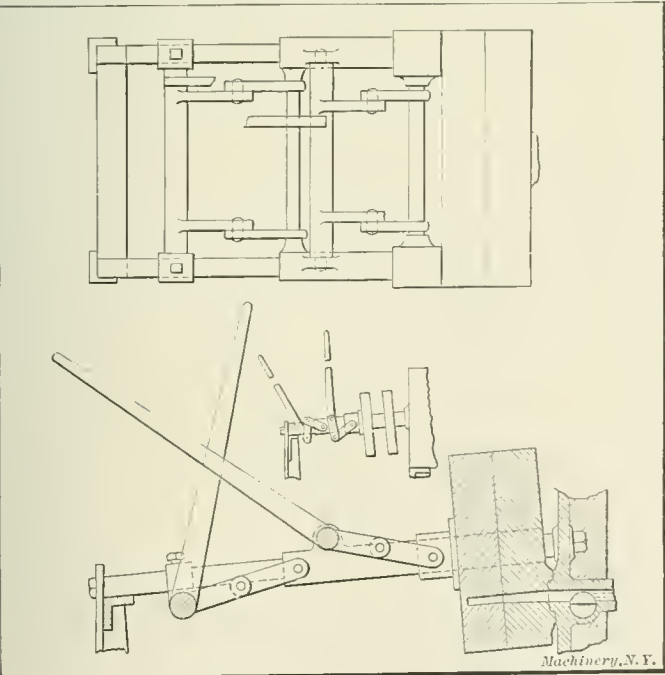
Toggle-joint Arrangement for Parting the Mold and Drawing it away from the Spout
